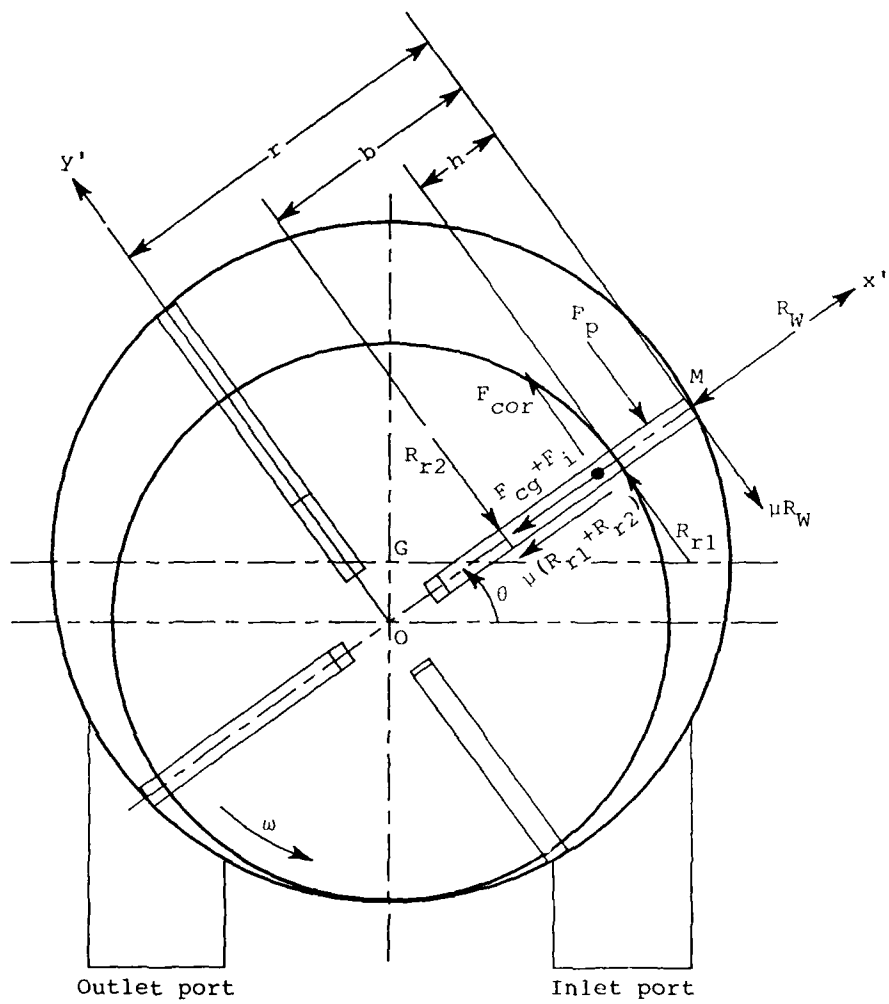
TYPE 2 SLIDING VANE COMPRESSOR
